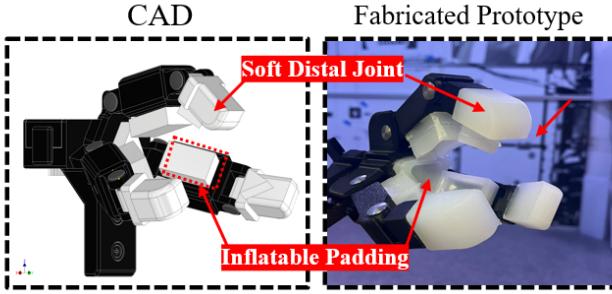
Fabricated rigid-soft gripper prototype next to its CAD model with labeled soft joints and inflatable padding areas.
